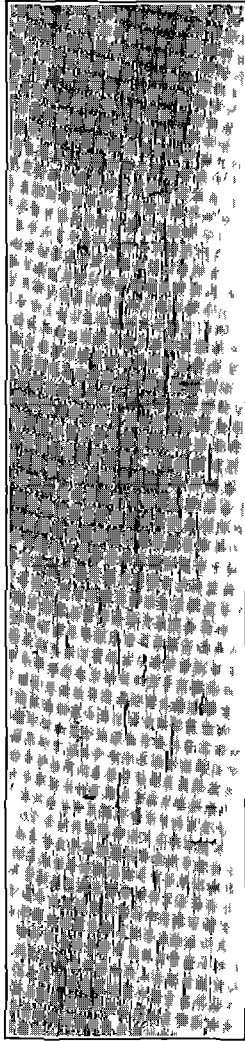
Head of a 140 pound rail planed off $\frac{1}{8}$ inch and surface pickled. Incipient transverse fissures from surface stress would also longitudinal slag cracks.
